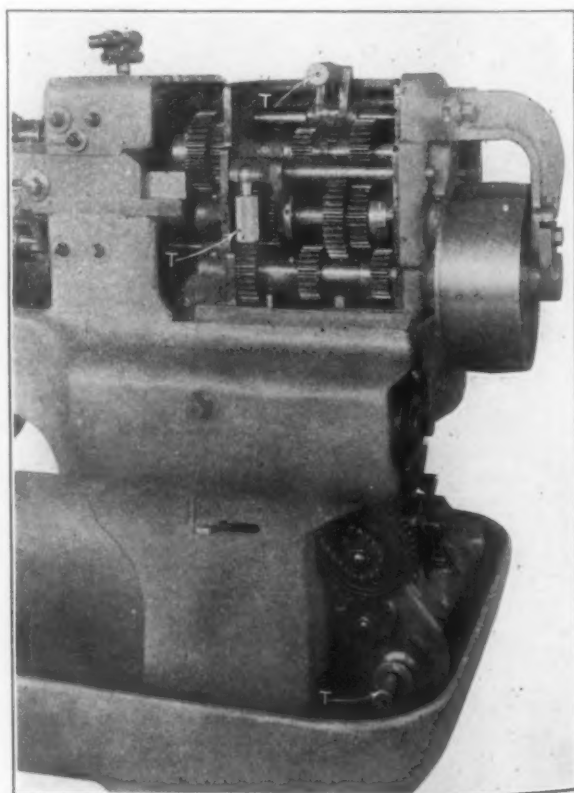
Gear Drive for Both Spindles and Cam Shafts; at T, T are the Shifting Levers
